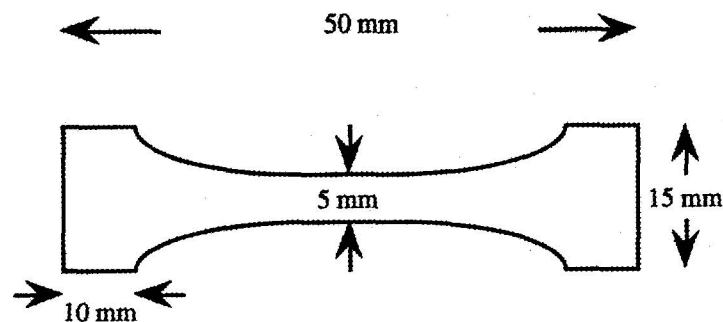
Dog bone shaped die mold used to section the aorta, intestine, and biomaterial samples for mechanical testing.
